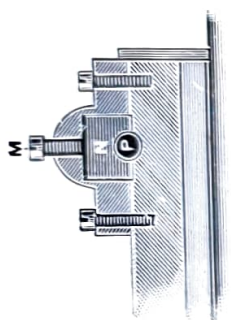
Sectional View of adjustable fittings of rack and pinion.
